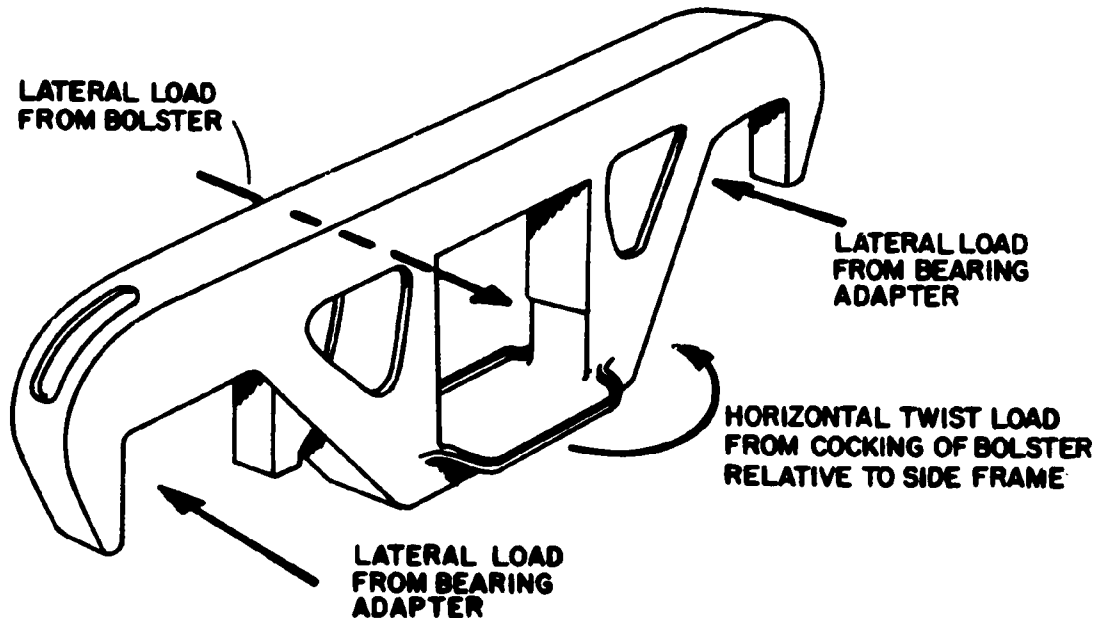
SIDE FRAME LATERAL AND HORIZONTAL TWIST LOADS
